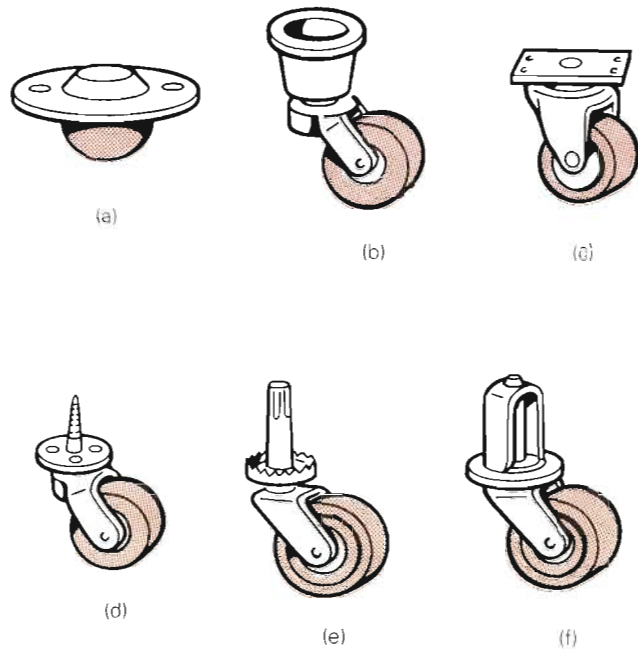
Types of castor: (a) ball, (b) round socket, (c) plate, (d) screw, (e) grip-neck socket, (f) tubular.
